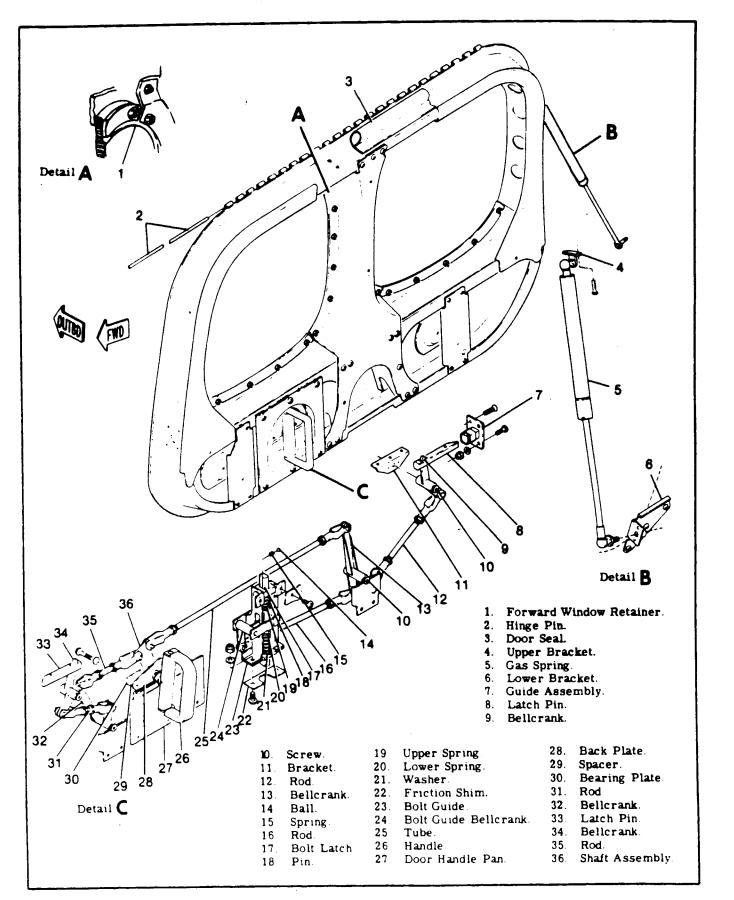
Emergency Exit Door Installation (Sheet 2 of 2).
